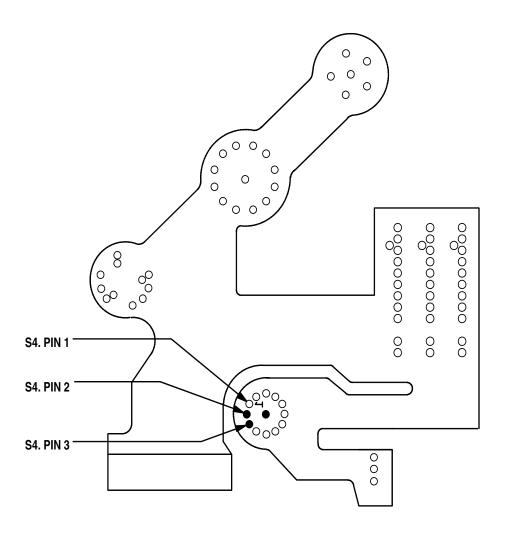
Rear View of Good Flexible-Switch Assembly (1A17A1W2)
